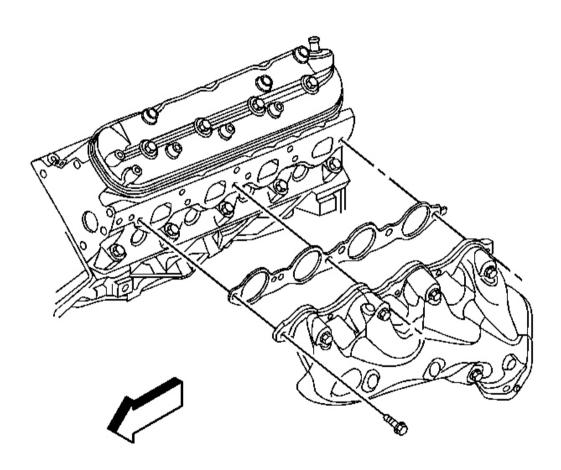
View Of Exhaust Manifold, Manifold Bolts & Gasket Courtesy of GENERAL MOTORS CORP.
